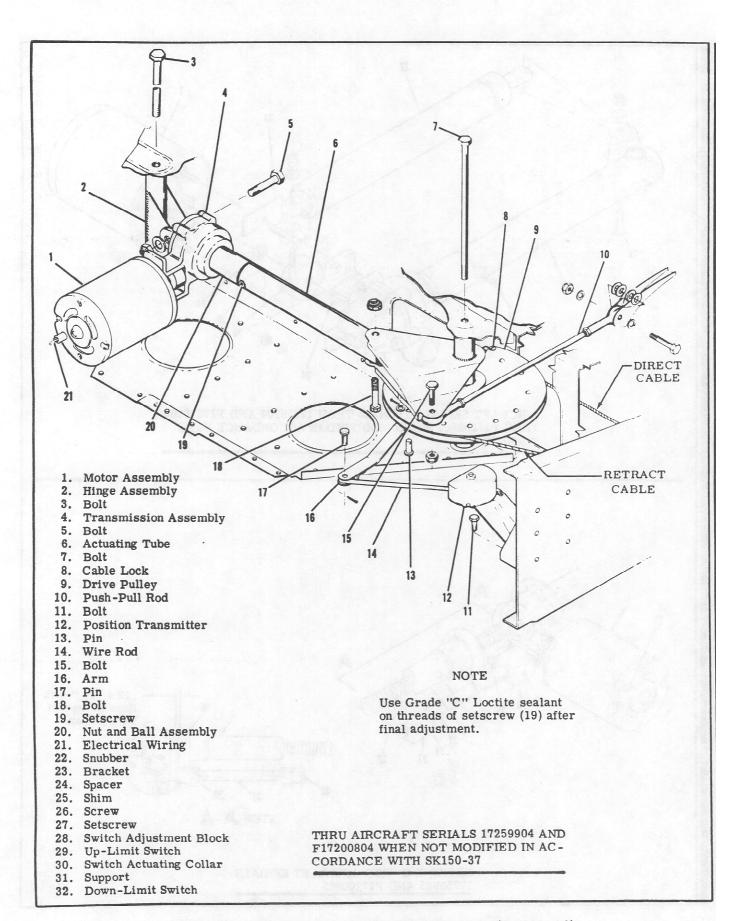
Flap Motor and Transmission Assembly (Sheet 1 of 3)
